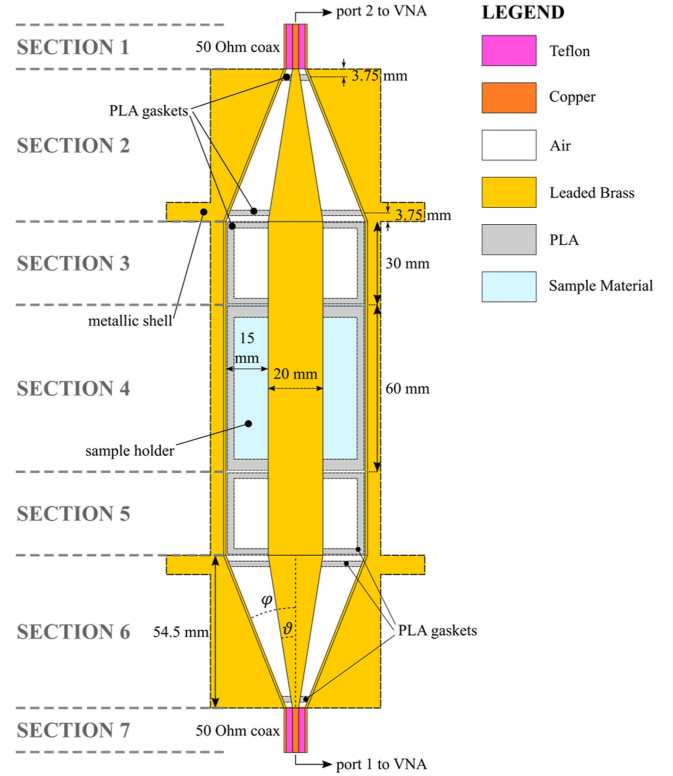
Dimensional drawing of the coaxial fixture, highlighting the sections and the materials.
